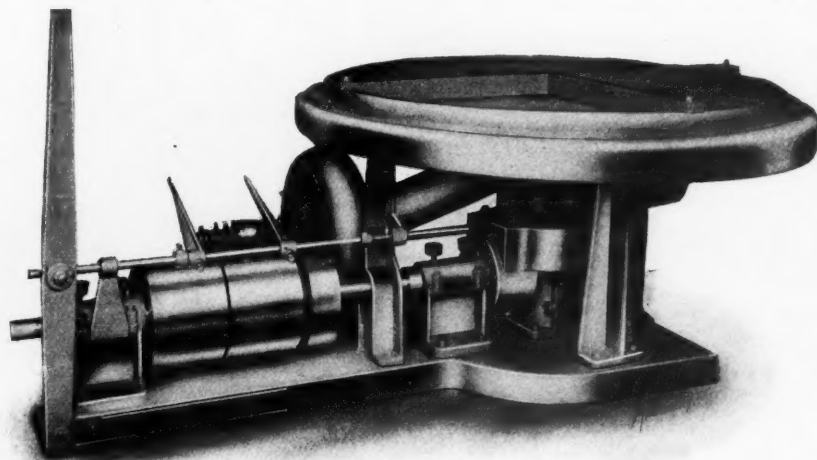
Besly 53-inch Vertical-spindle Disk Grinder
